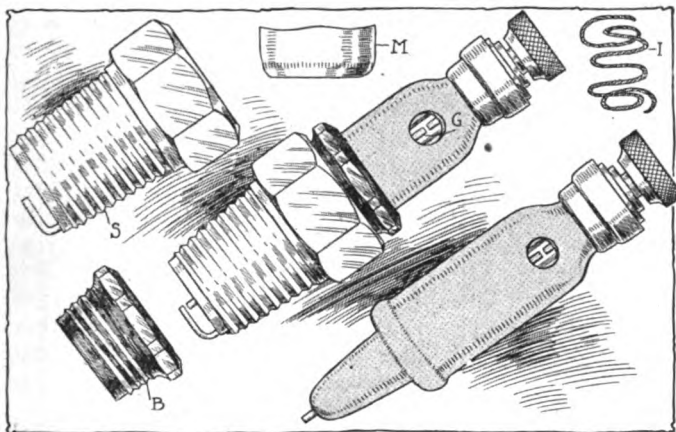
Jeffery-Dewitt visible spark-plug and component parts
